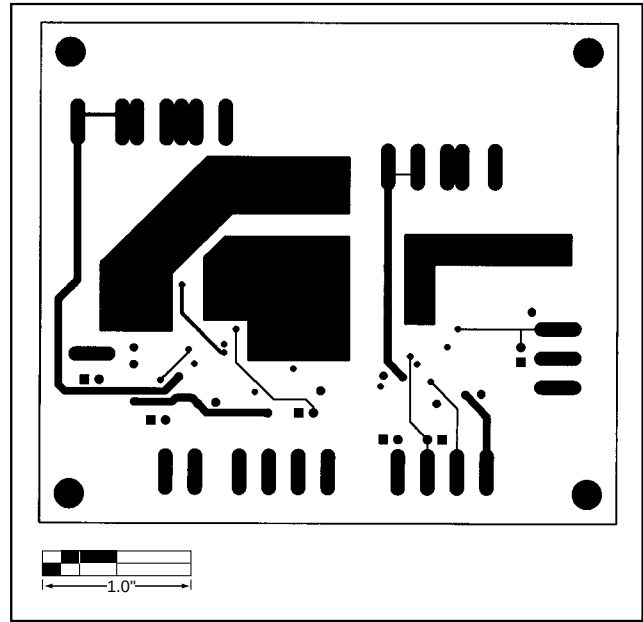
MAX1637 EV Kit PC Board Layout—Solder Side
